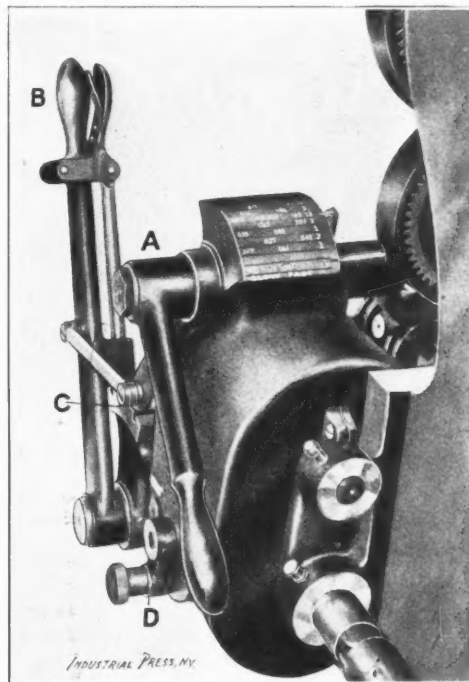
Feed Box of Becker-Brainard Milling Machine.
